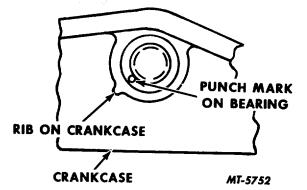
Installation of Oil Pump and Tachometer Drive Shaft Bearing in Crankcase.
